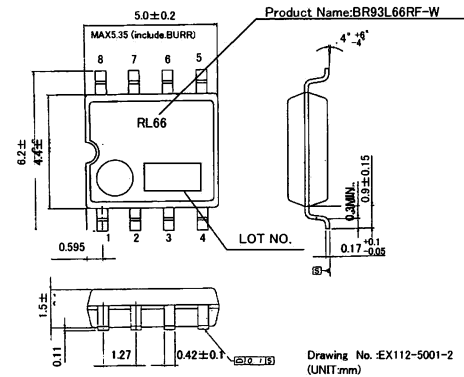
(d) PHYSICAL DIMENSION SOP8 (BR93L66RF-W)
